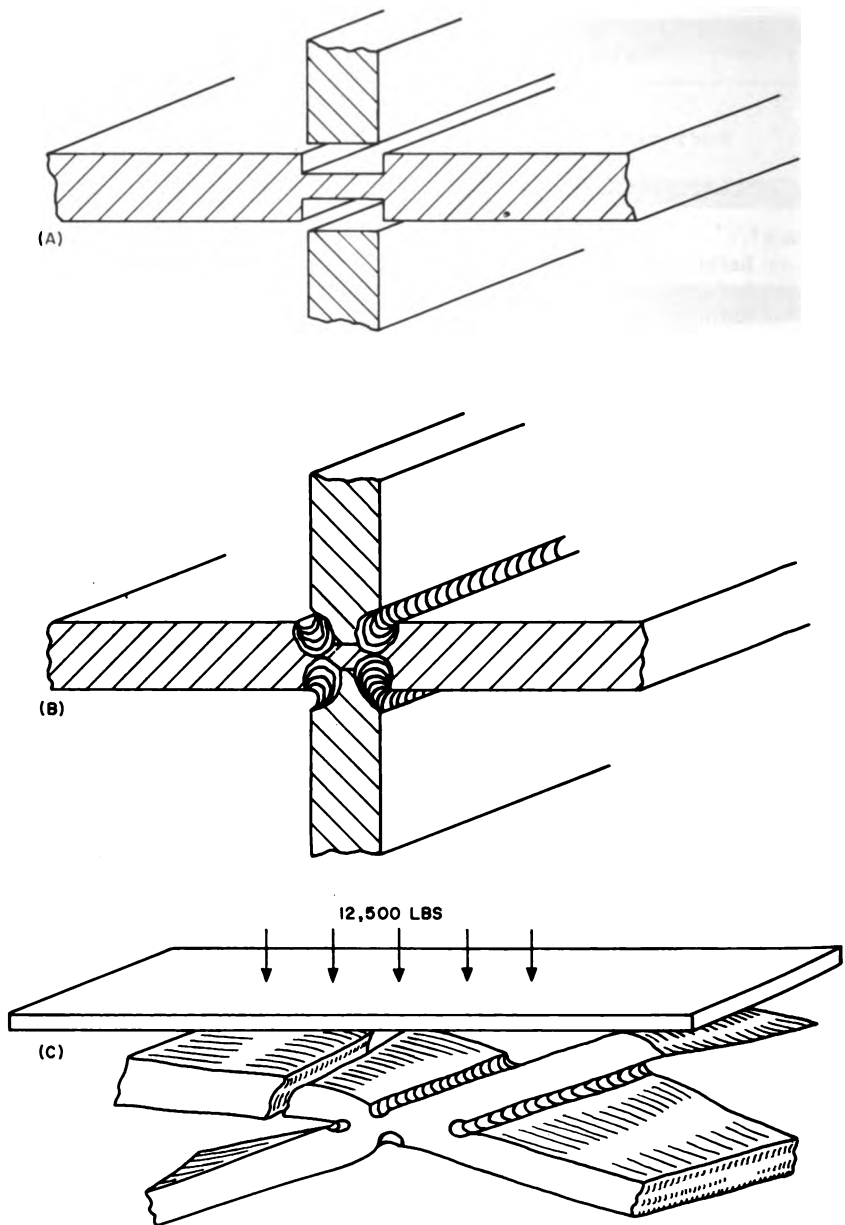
A Two-Pass Welding Joint Design for Fabricating Cruciform Shapes: (a) Component Design; (b) Weld Position; (c) Crush Test.
